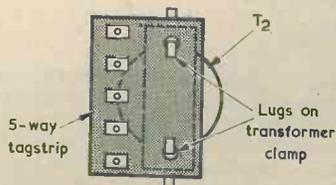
A 5-way tagstrip is fitted to the output transformer
